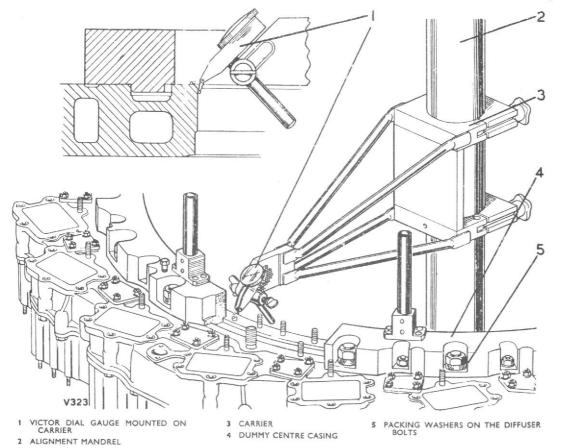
Checking concentricity of the diffuser rear cover and sealing face
